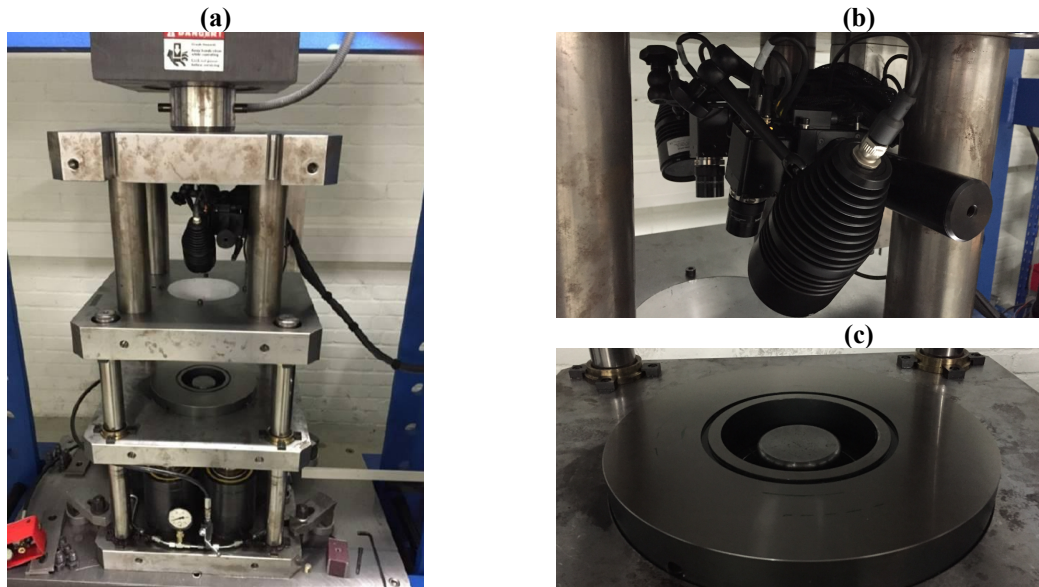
Test equipment of the Mini-CCT tests at IFU, (a) overview of the equipment; (a) Cameras of GOM ARAMIS optical measurement system fixed in the test device; (c): blank holder and punch used in Mini-CCT test
